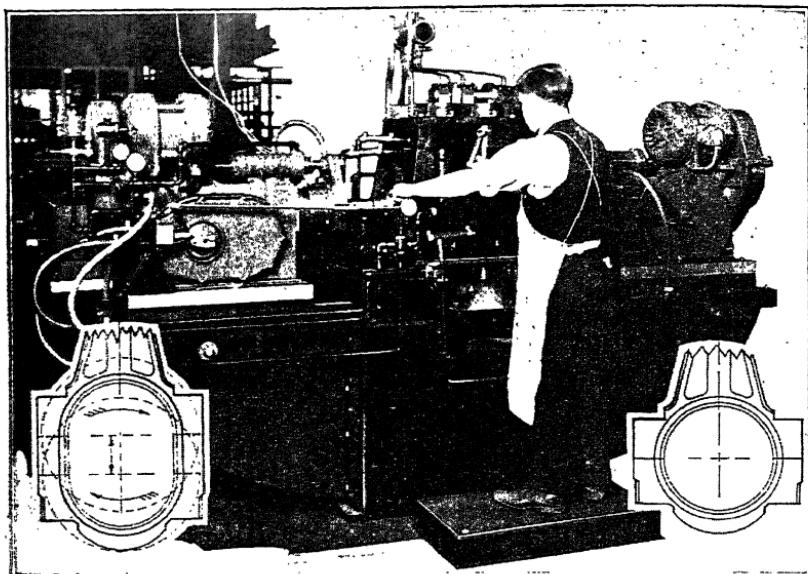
Machine Designed to Face and Bevel the Elliptical Main Bearing Hole of an Oldsmobile Connecting Rod. Diagram at Lower Left, Slightly Exaggerated, Shows Path of Circular Cutter in the Ellipse. Diagram at Right Shows Connecting Rod Bearing After It Has Been Cut in Two Parts, Now Forming a Perfect Circle
